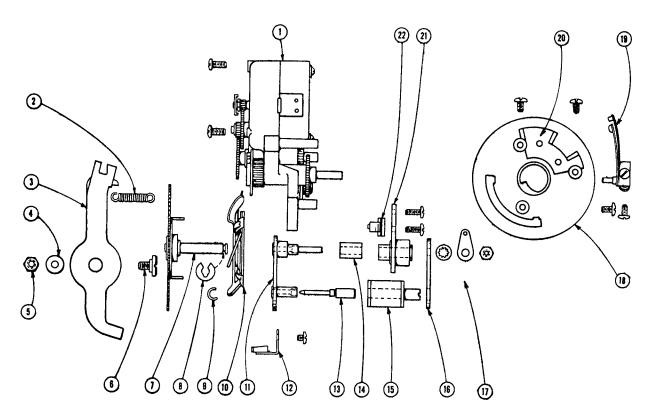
MOTOR. CREDIT & CONTACT ASSEMBLY
